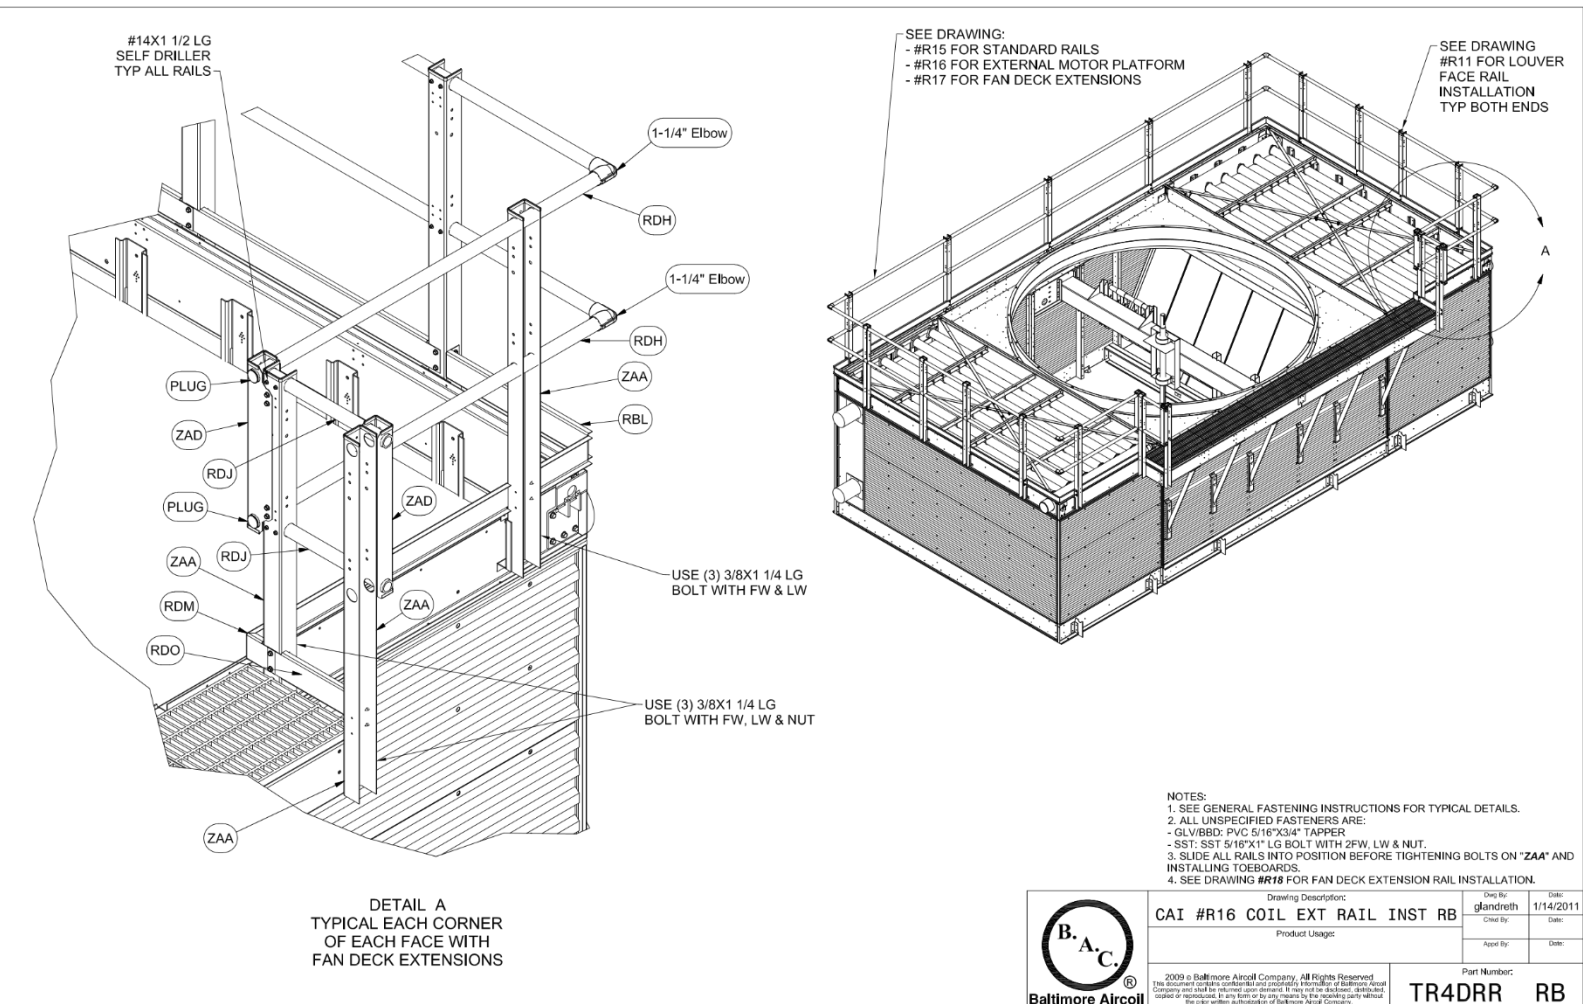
TR4DRR Fan Deck Extension Railings Installation
